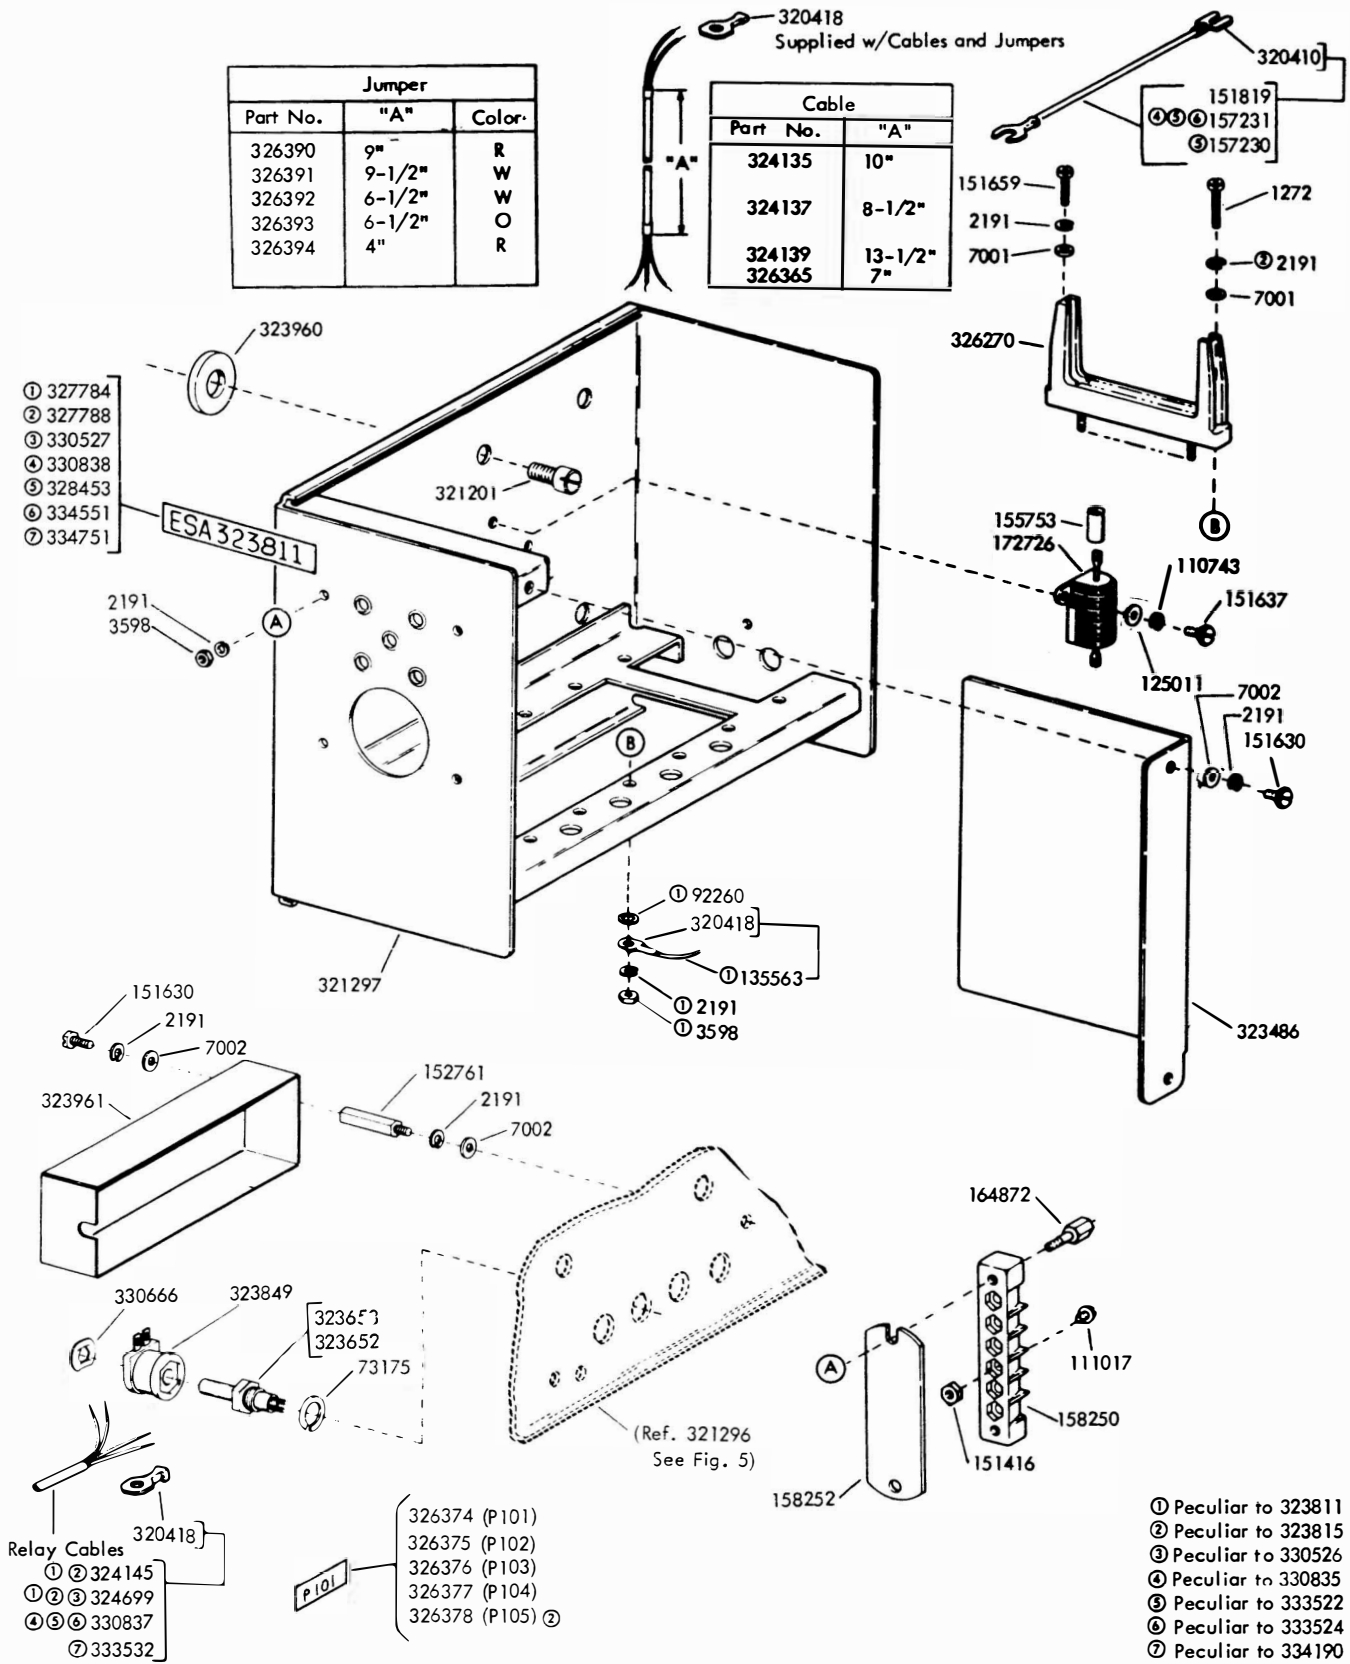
323811, 323815, 330526, 330835, 333522, 333524 and 334190 ELECTRICAL SERVICE ASSEMBLIES (Continued)
